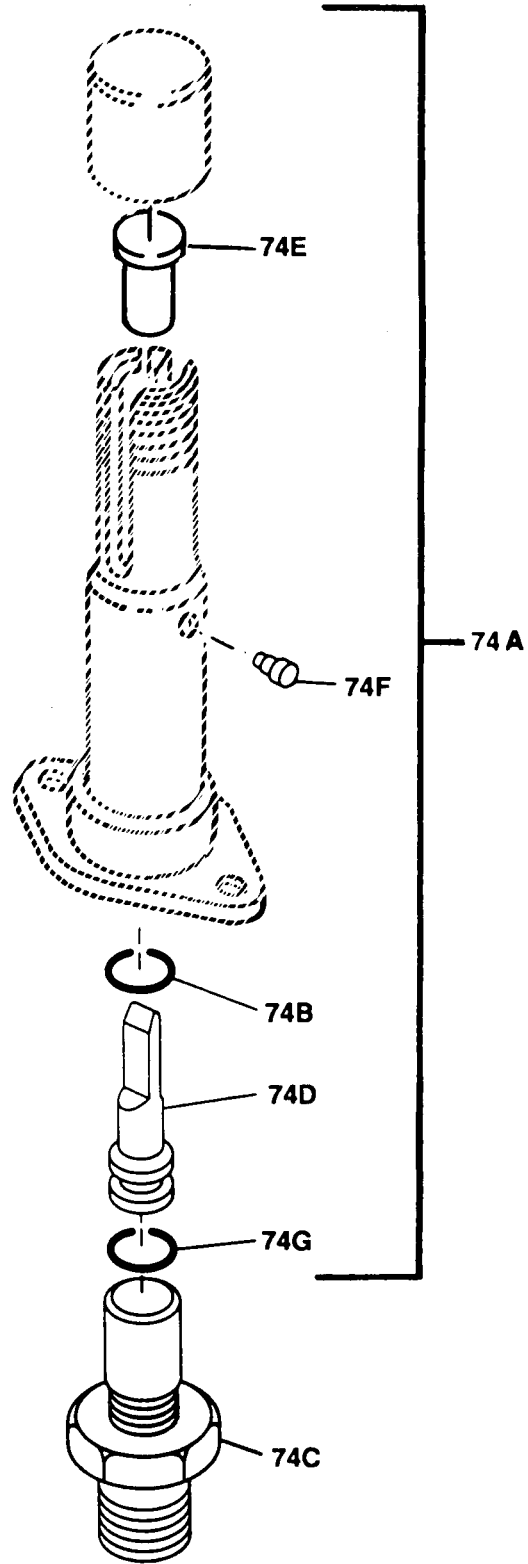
Boom Head Assy (Sheet 4 of 4)
